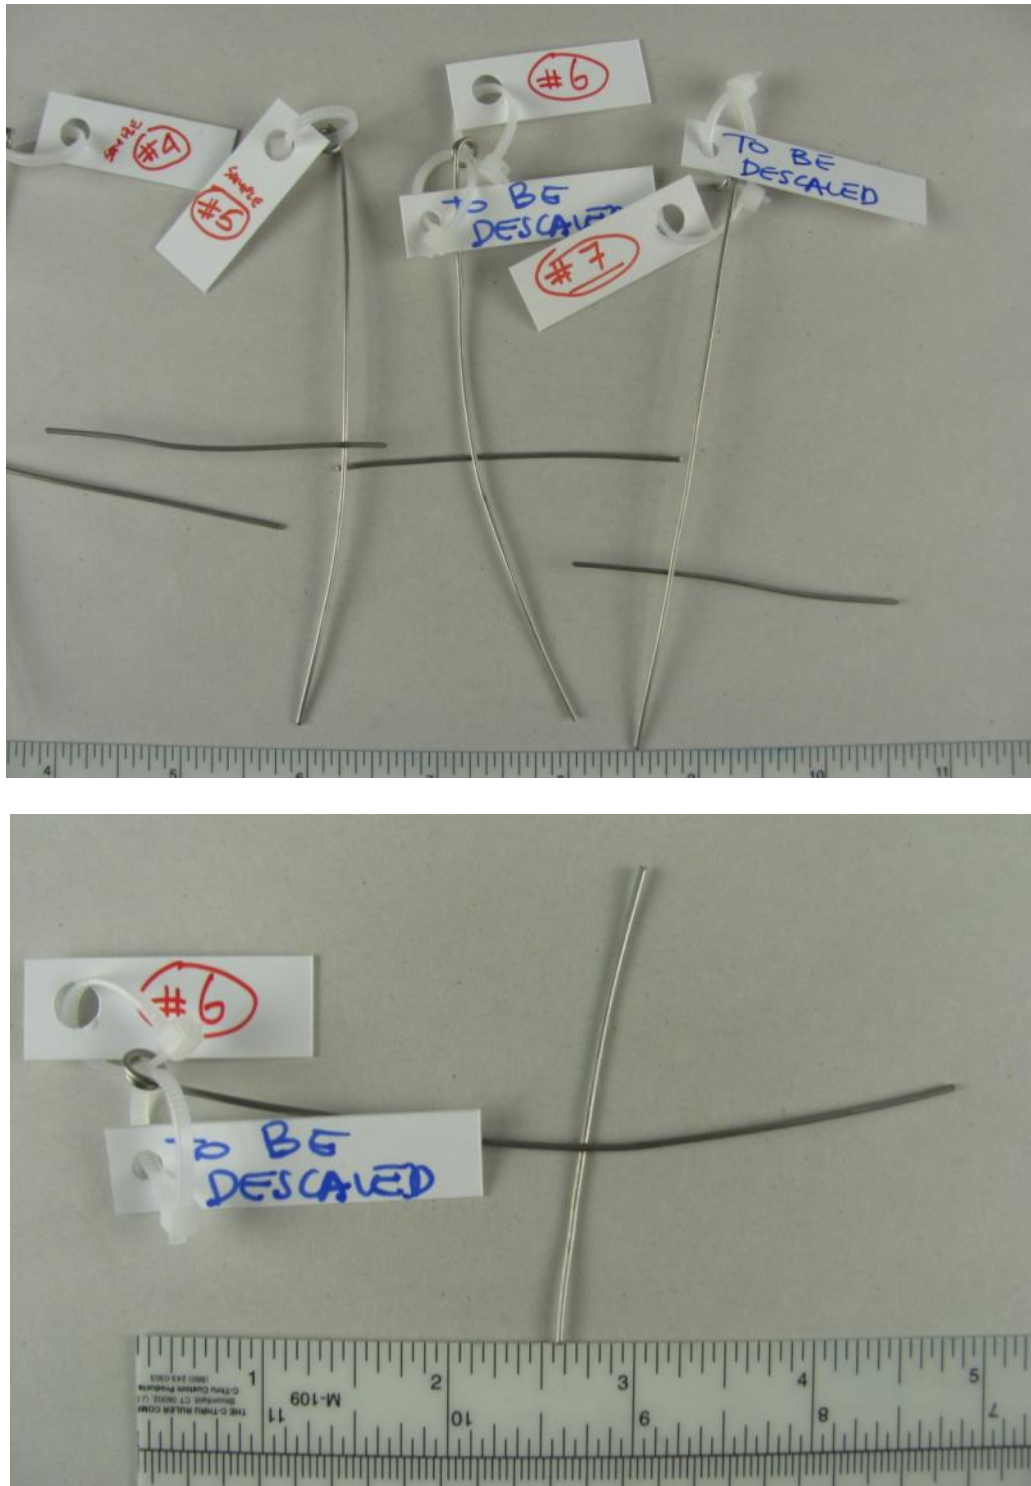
Macro photographs showing some of the Type 316L solid wire weld samples and tags prior to descale / passivation and salt spray testing. Samples #4, #5, #6 and #7 are shown.
